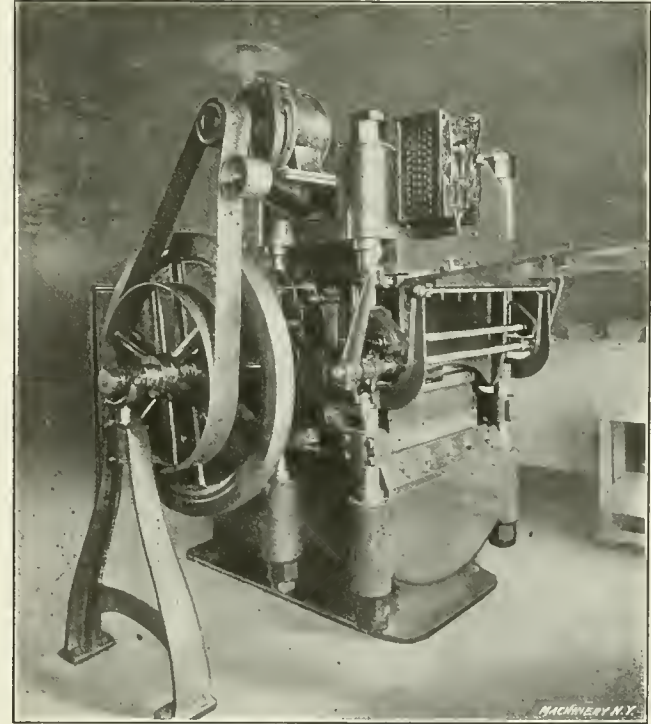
Seybold Embossing Press with Wiring in Conduit
